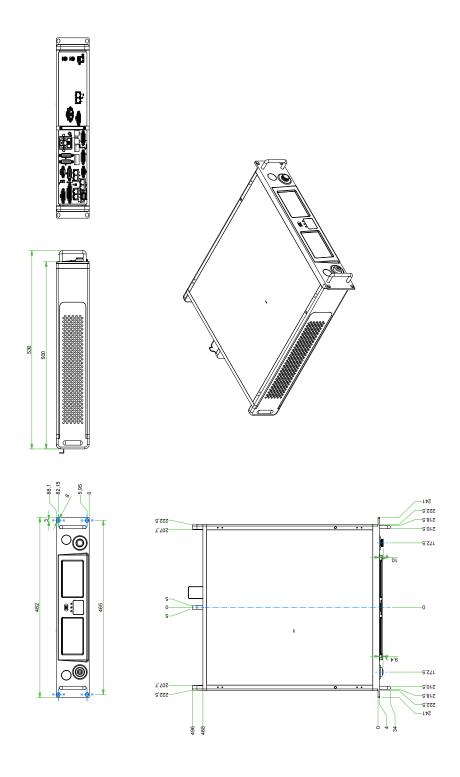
ASC-2 V41: Dimensions and mounting
